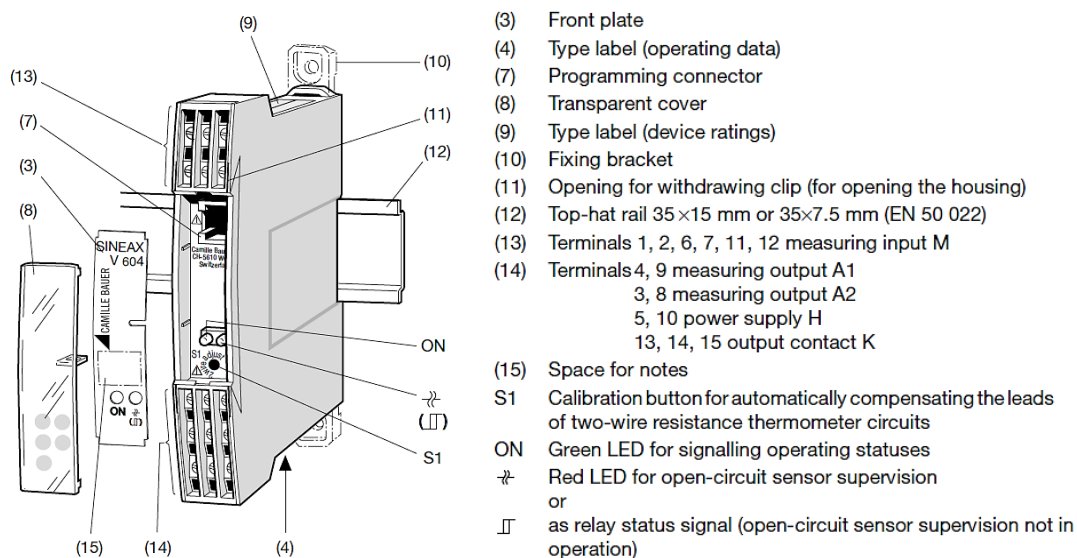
Parts of SINEAX V 604 Universal Transmitter
